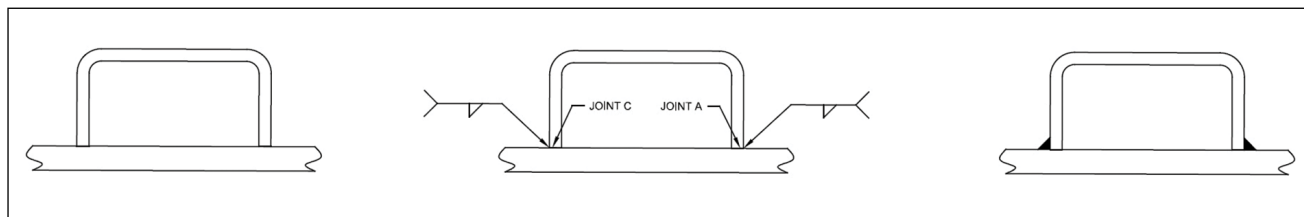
Channel on plate with welding symbol for each leg.
